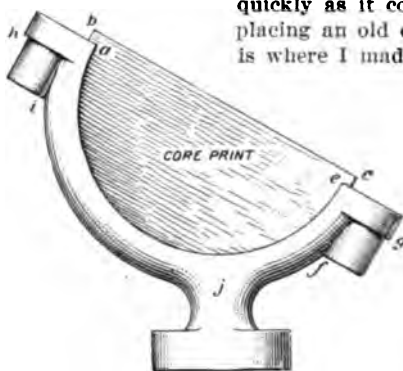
Pattern for Half of Eccentric Strap, Ready for Molding.
